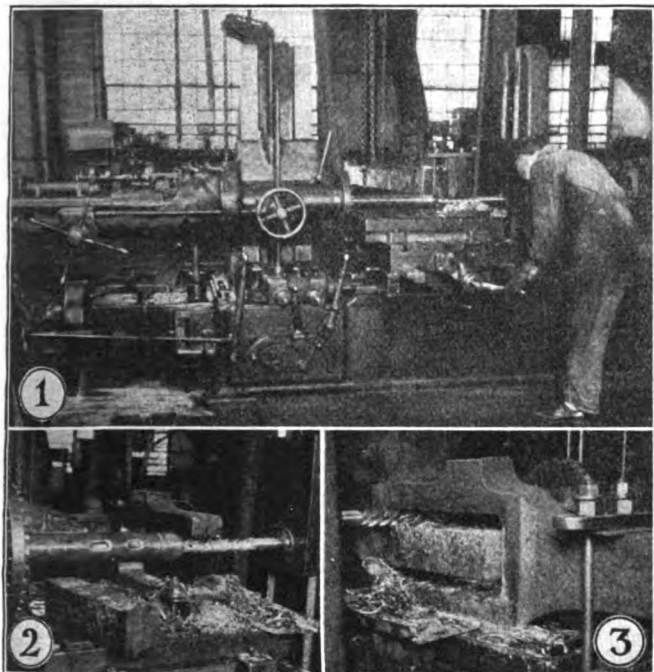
(1) Starting to mill out the back end of a main rod; (2) Starting the second or finishing cut; (3) Ready to remove the block at the end of the first cut
